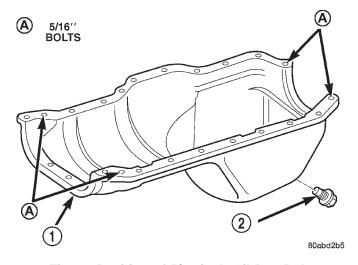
Position of 5/16 inch Oil Pan Bolts
